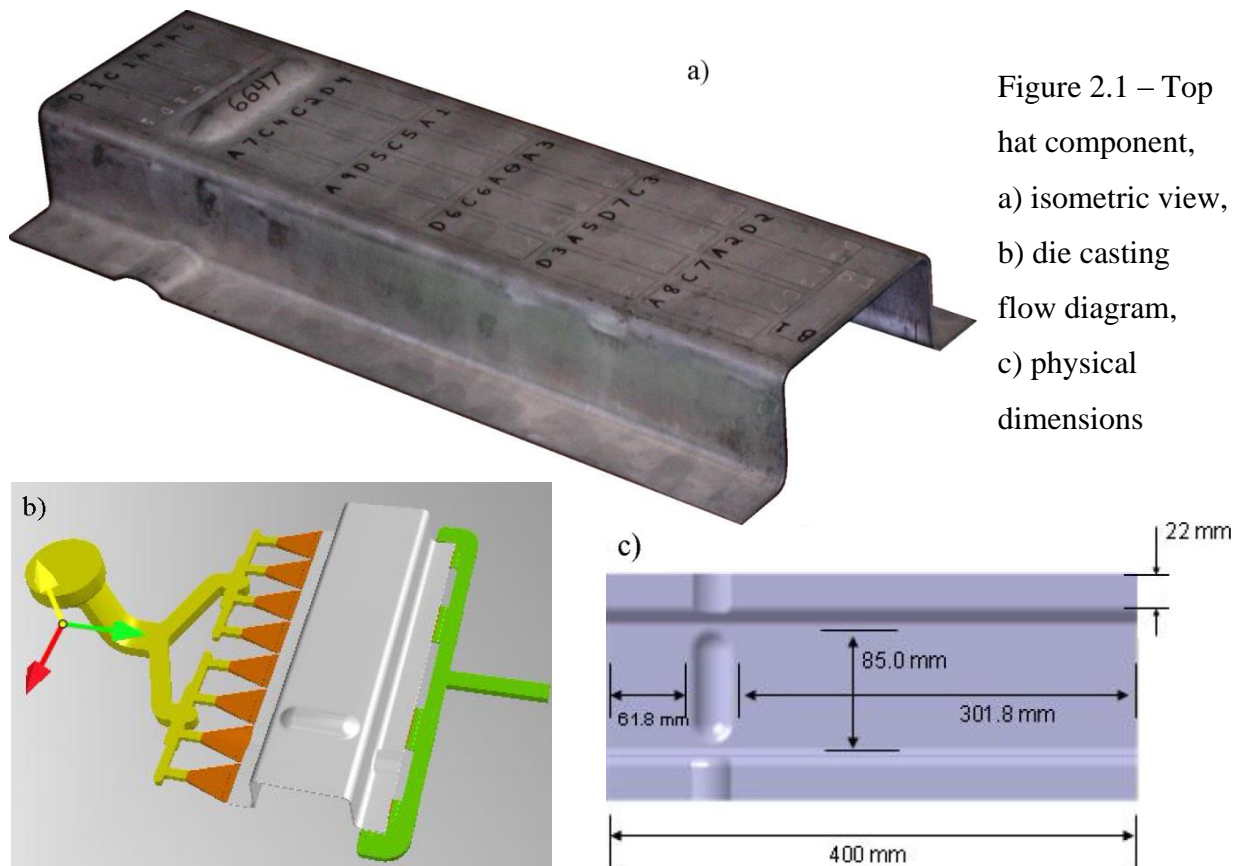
Top hat component, a) isometric view, b) die casting flow diagram, c) physical dimensions
